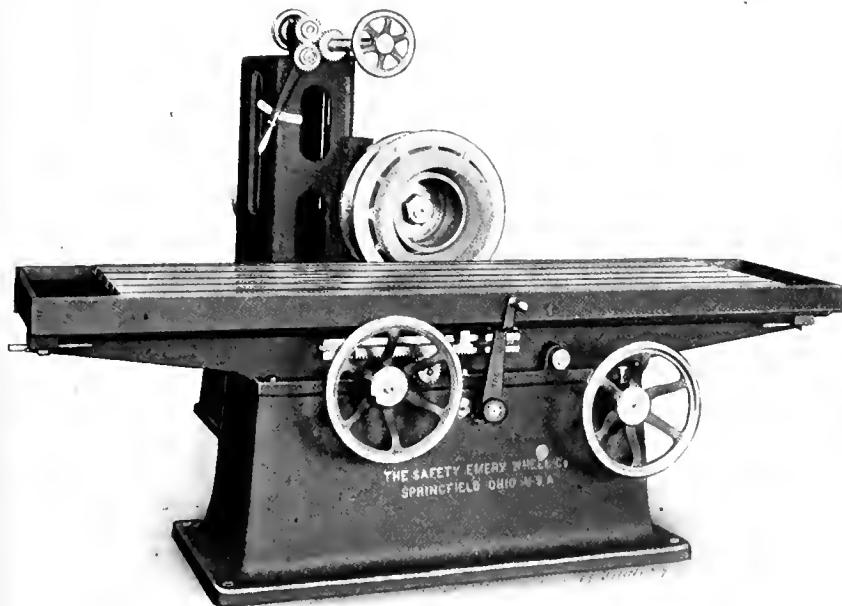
Front View of Springfield Edge Grinder, note the Safety Chuck for the Ring Emery Wheel.
